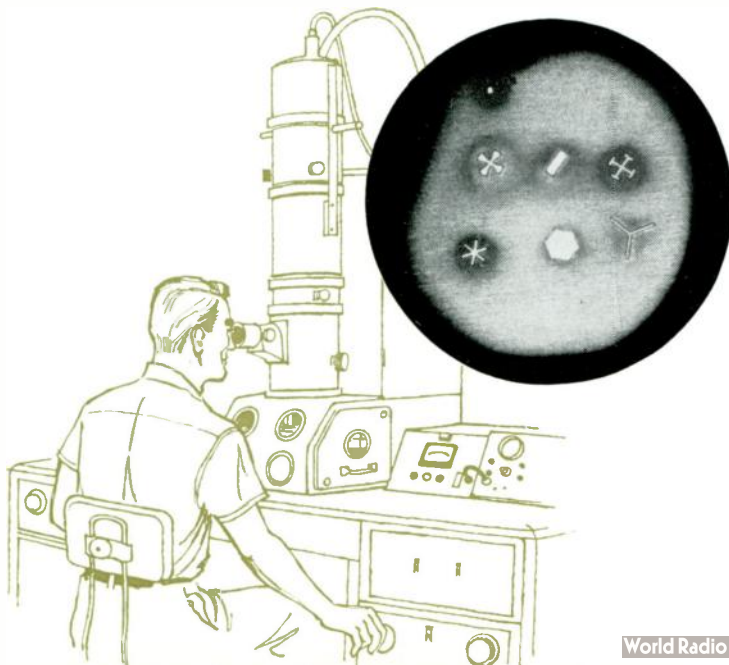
(Left) This electron milling machine is being used in the Manufacturing Laboratory. Inset shows shapes cut in 0.005 inch thick stainless steel by an electron beam under automatically programmed control. Each figure is about 0.02 inch across.
